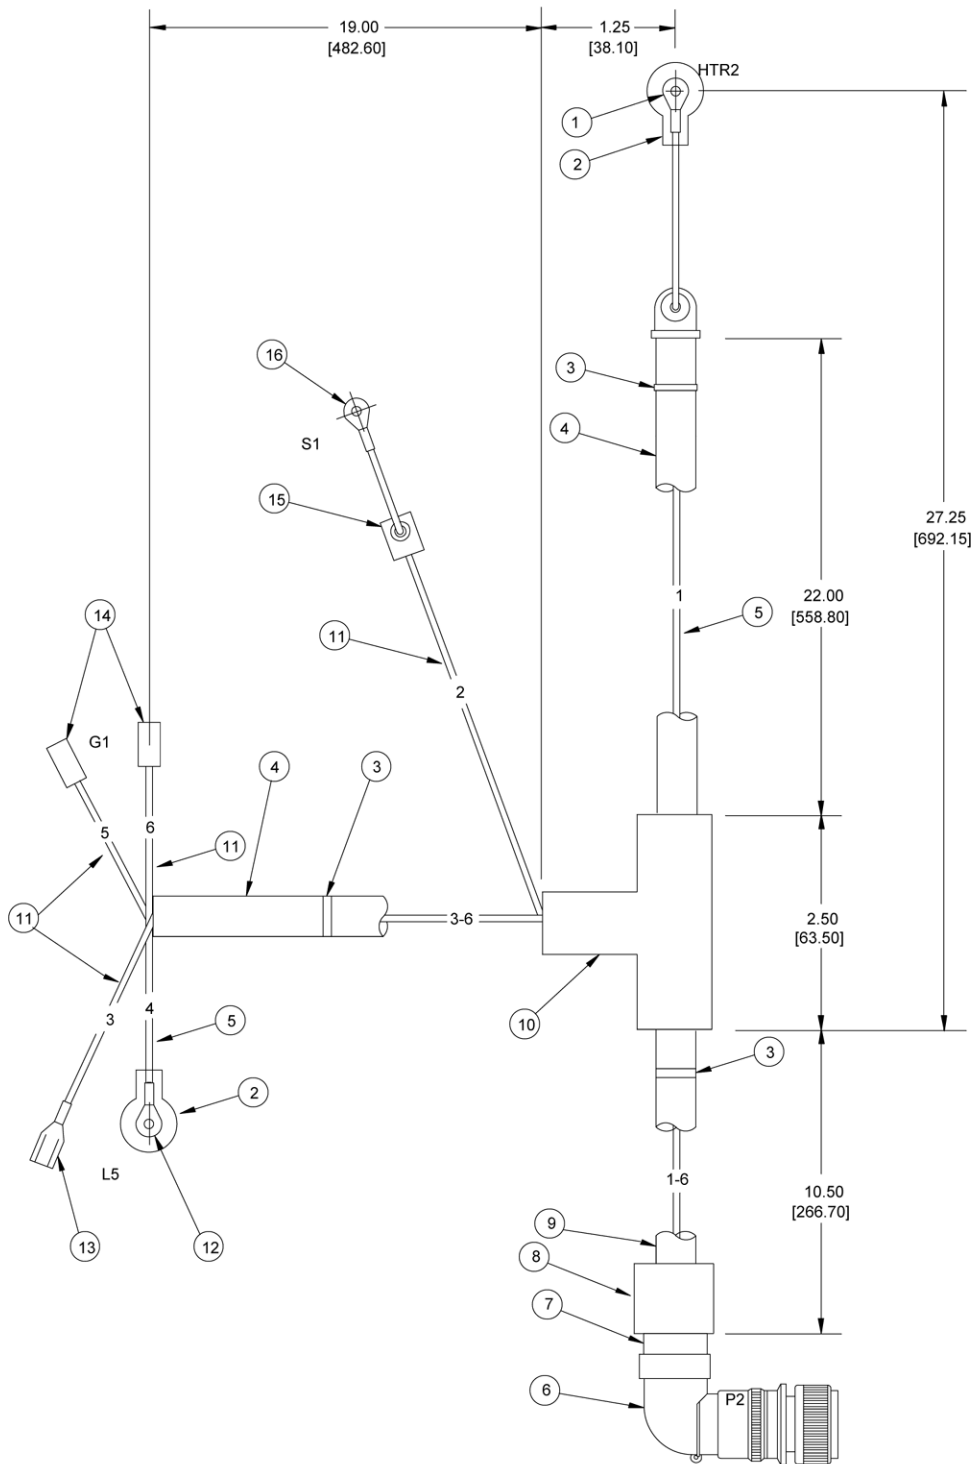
Wiring Harness, Engine (P/N: 95-8029) (Sheet 1 of 3).
